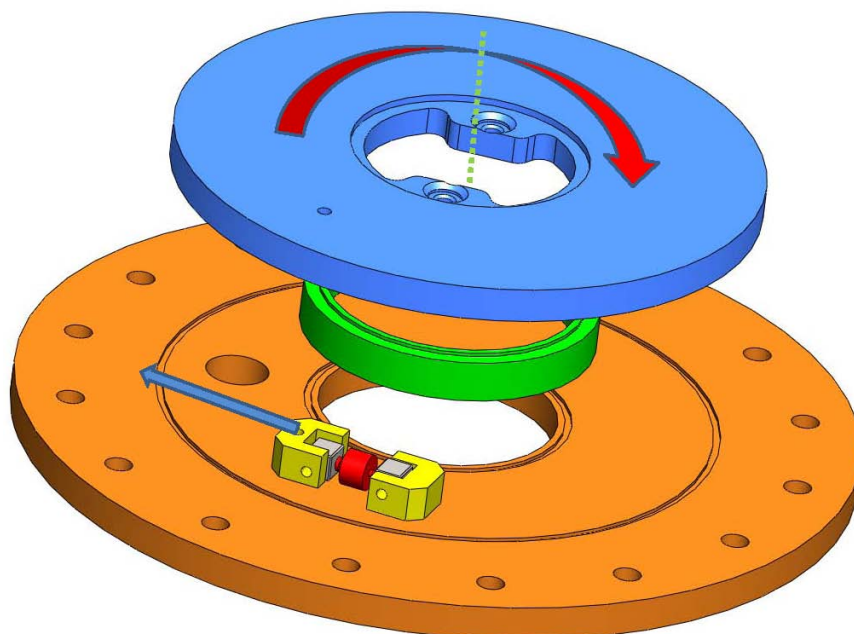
Superwind torque measurement assembly - The 3D CAD model of a torque measurement assembly consisting of two plates and a force transducer in between. The bottom plate (orange) is fixed to the frame while the top plate (blue) is fixed to the cryostat's TTE. The ring (green) has the purpose of simple bearing. It allows the rotation around the cryostat's axial axis. The force transducer element (red) is fixed to the bottom plate at one side and to the top plate on the other side (yellow). The torque (red arrow) experienced by the top plate is translated into an elongation force of a force transducer (blue arrow) and finally into a voltage signal from a strain gauge which is proportional to the torque.
